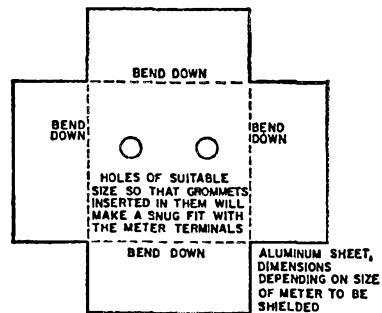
Details of the easy-to-make meter shield used in the MN-2000.
